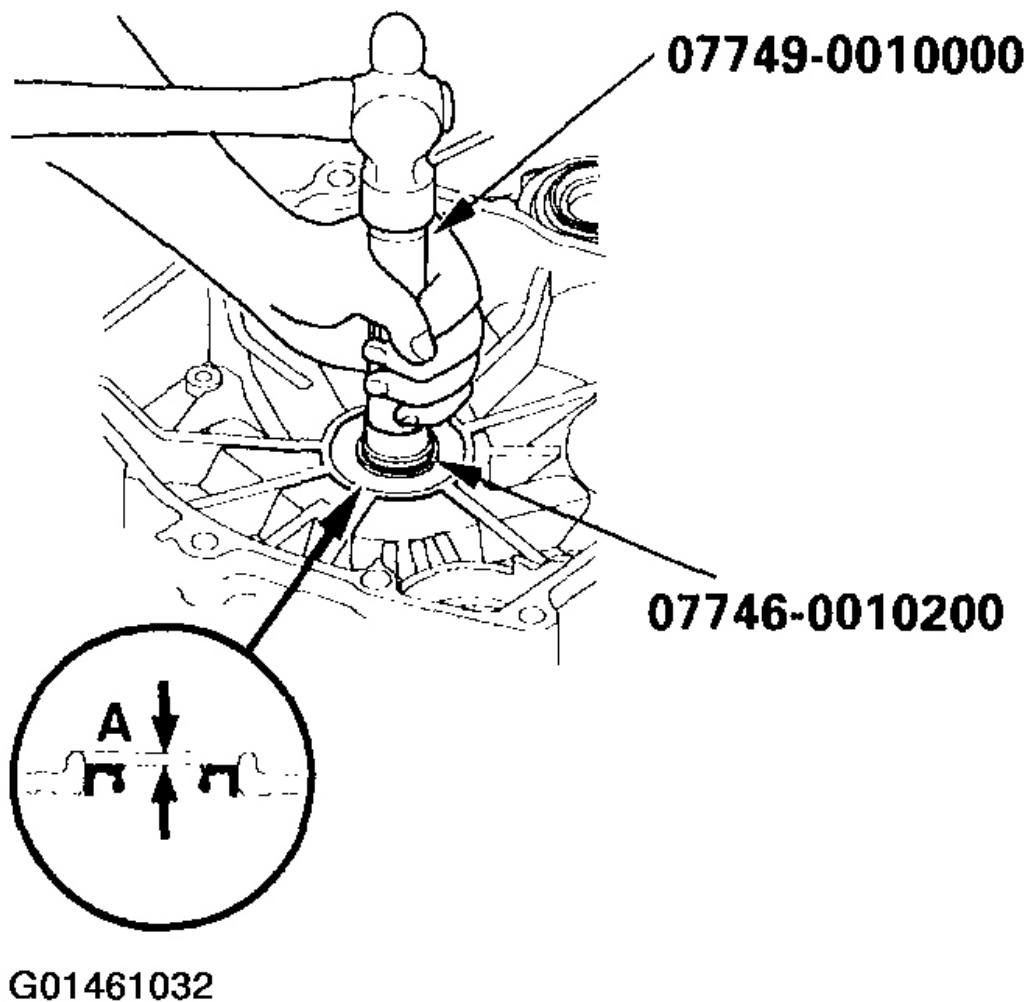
Installing New Oil Seal Flush With Flywheel Housing Level
